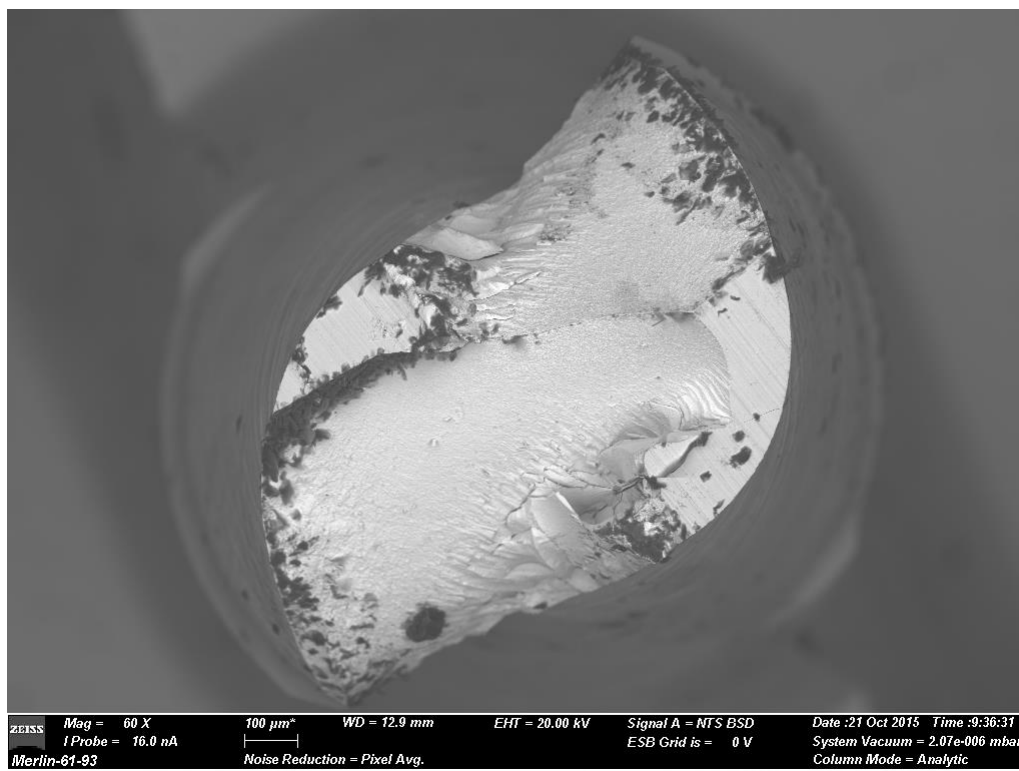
Experimental run 14: Tungsten carbide tool after machining with parameters $v_c = 80.11$ [m/min], $v_f = 937.3$ [mm/min] and $a_p = 106.42$ [μm]
